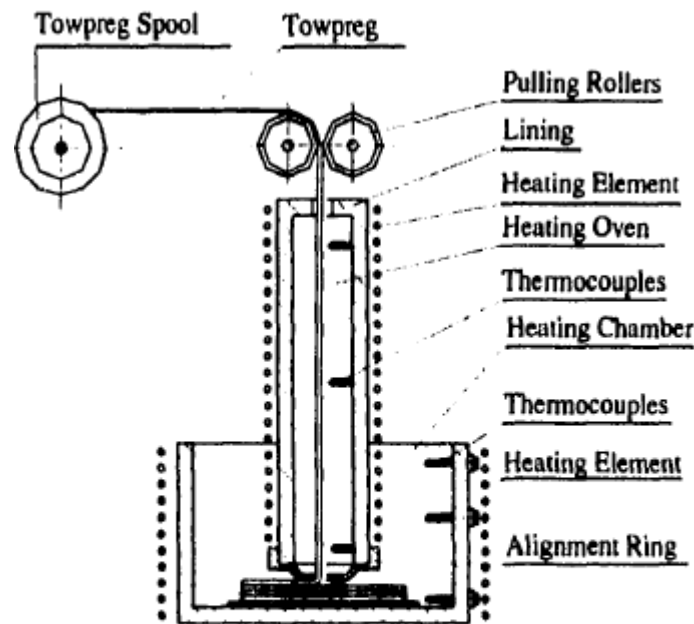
B The deposition roller is replaced by an alignment ring.
